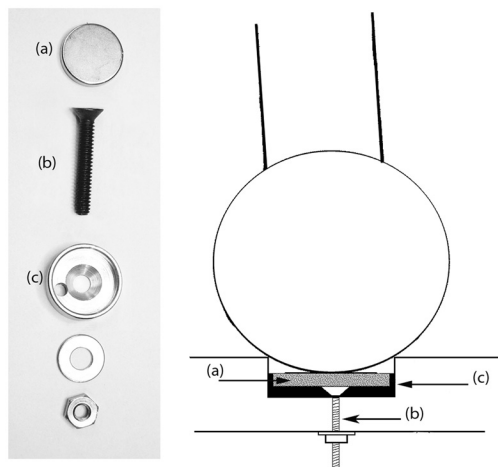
Hardware for attaching magnetic cup to casework and a cross section of the installation: (a) rare earth disc magnet, (b) machine screw, and (c) ferromagnetic cup.
